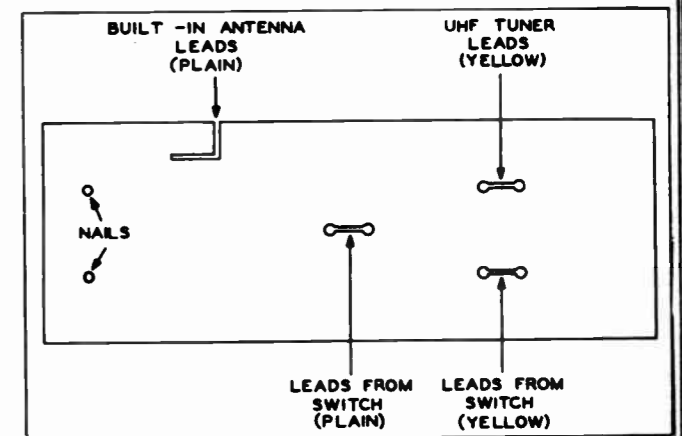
Rear View of VHF Tuner, Showing Lead Dress
